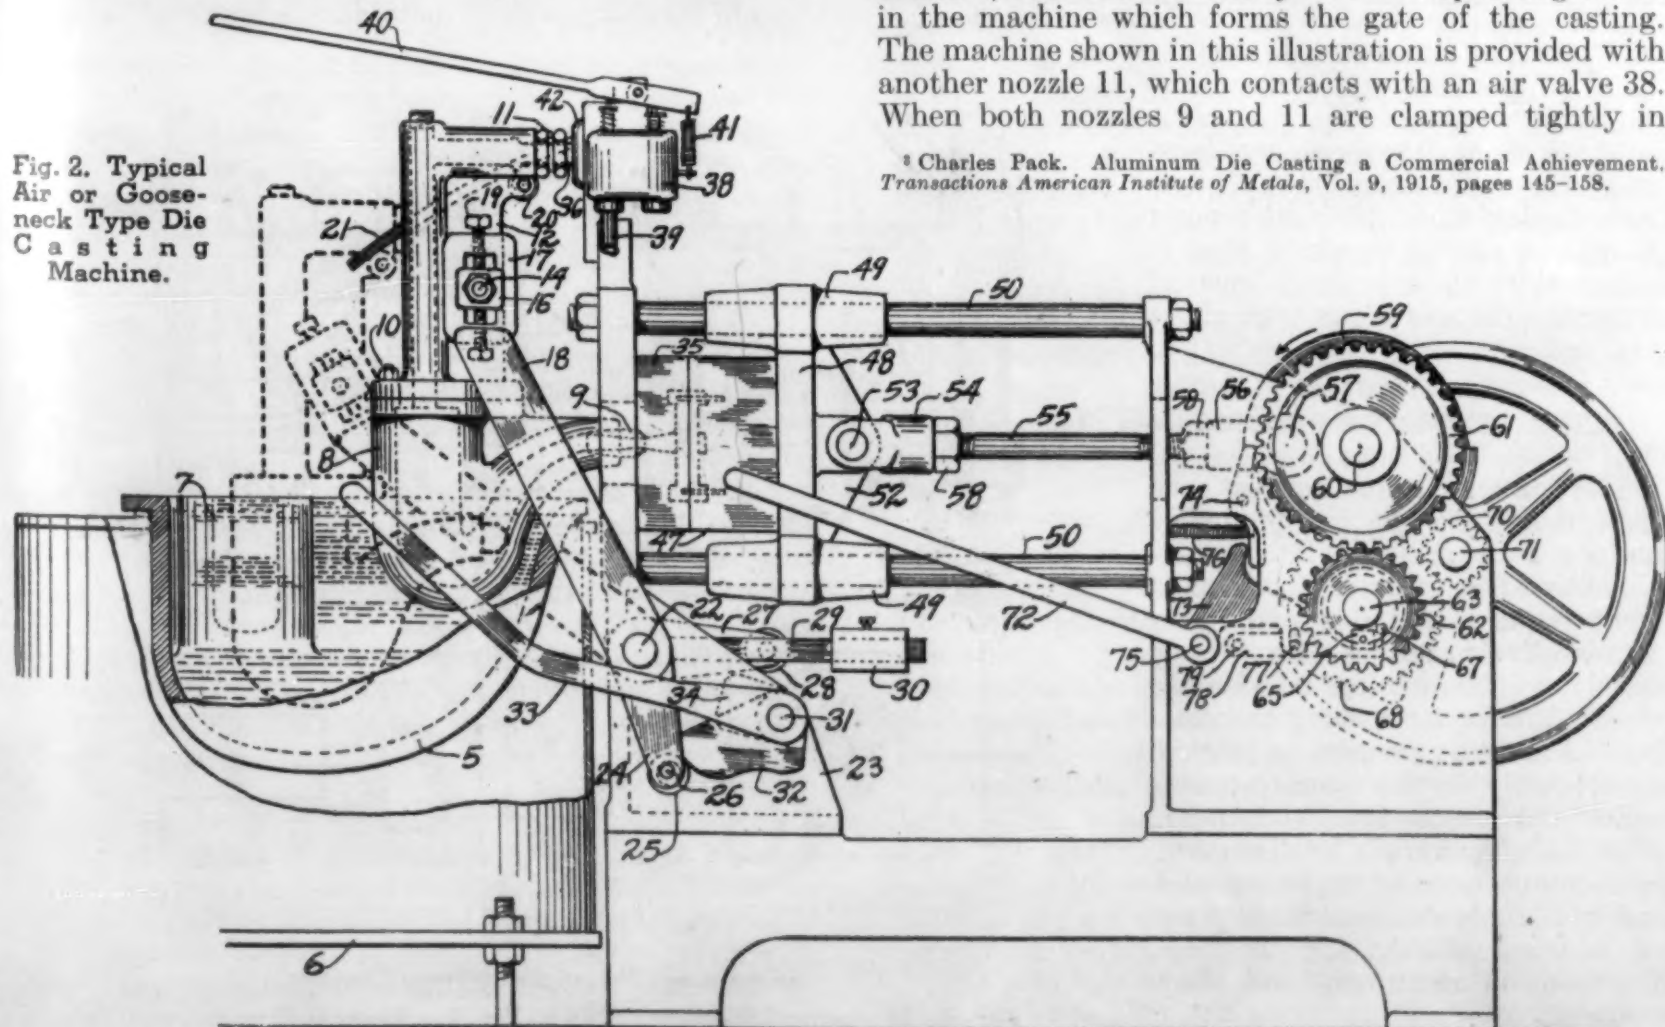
Typical Air or Goose-neck Type Die Casting Machine.
